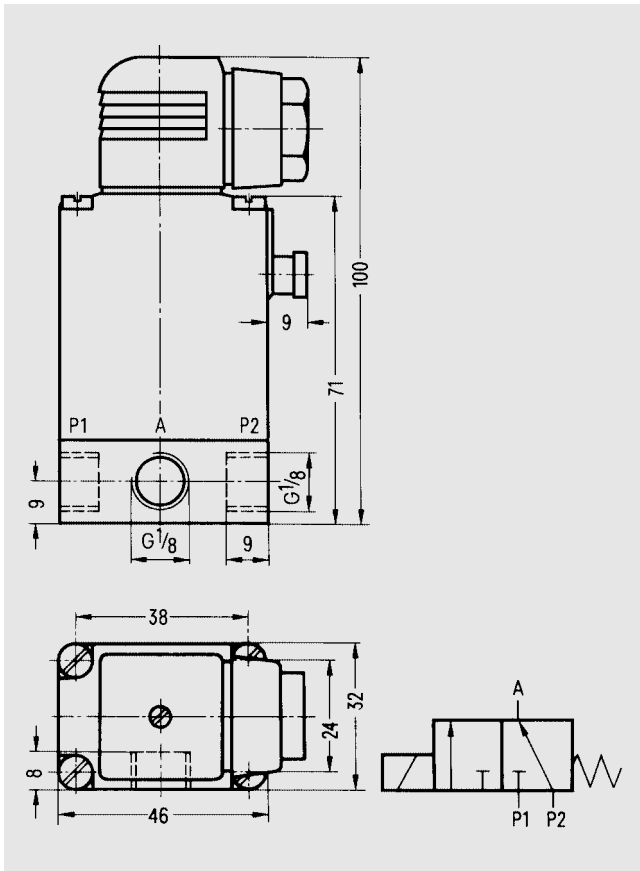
/29 3/2-way solenoid valve made of stainless steel
